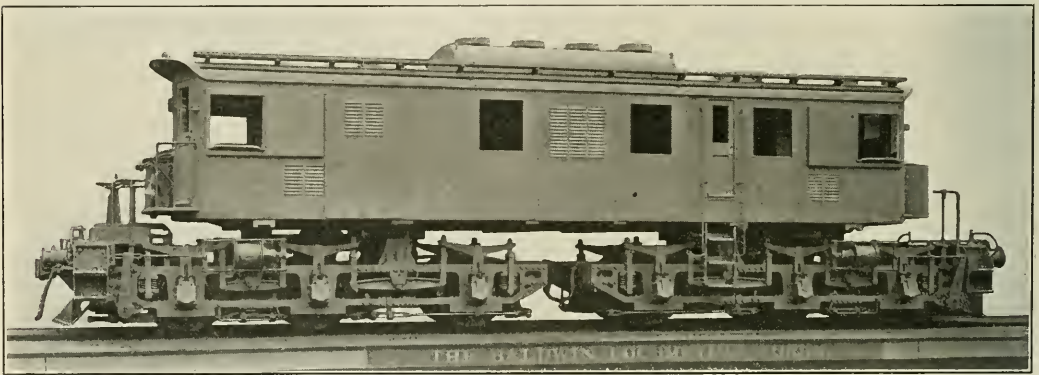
Assembled Mechanical Parts of an 060-060 Electric Locomotive without Electric Equipment
